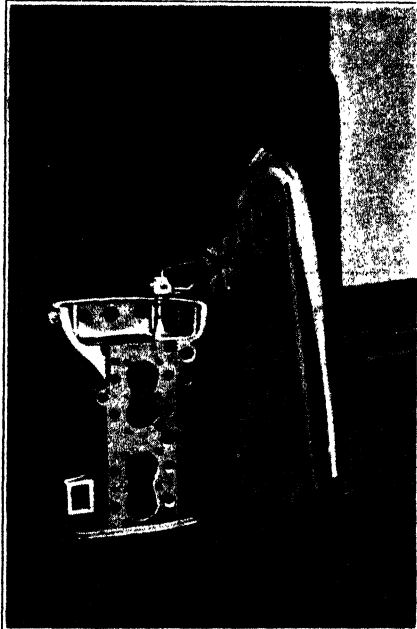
Repairing Defects in an Aluminium Casting by means of the Metal-spraying Pistol.
